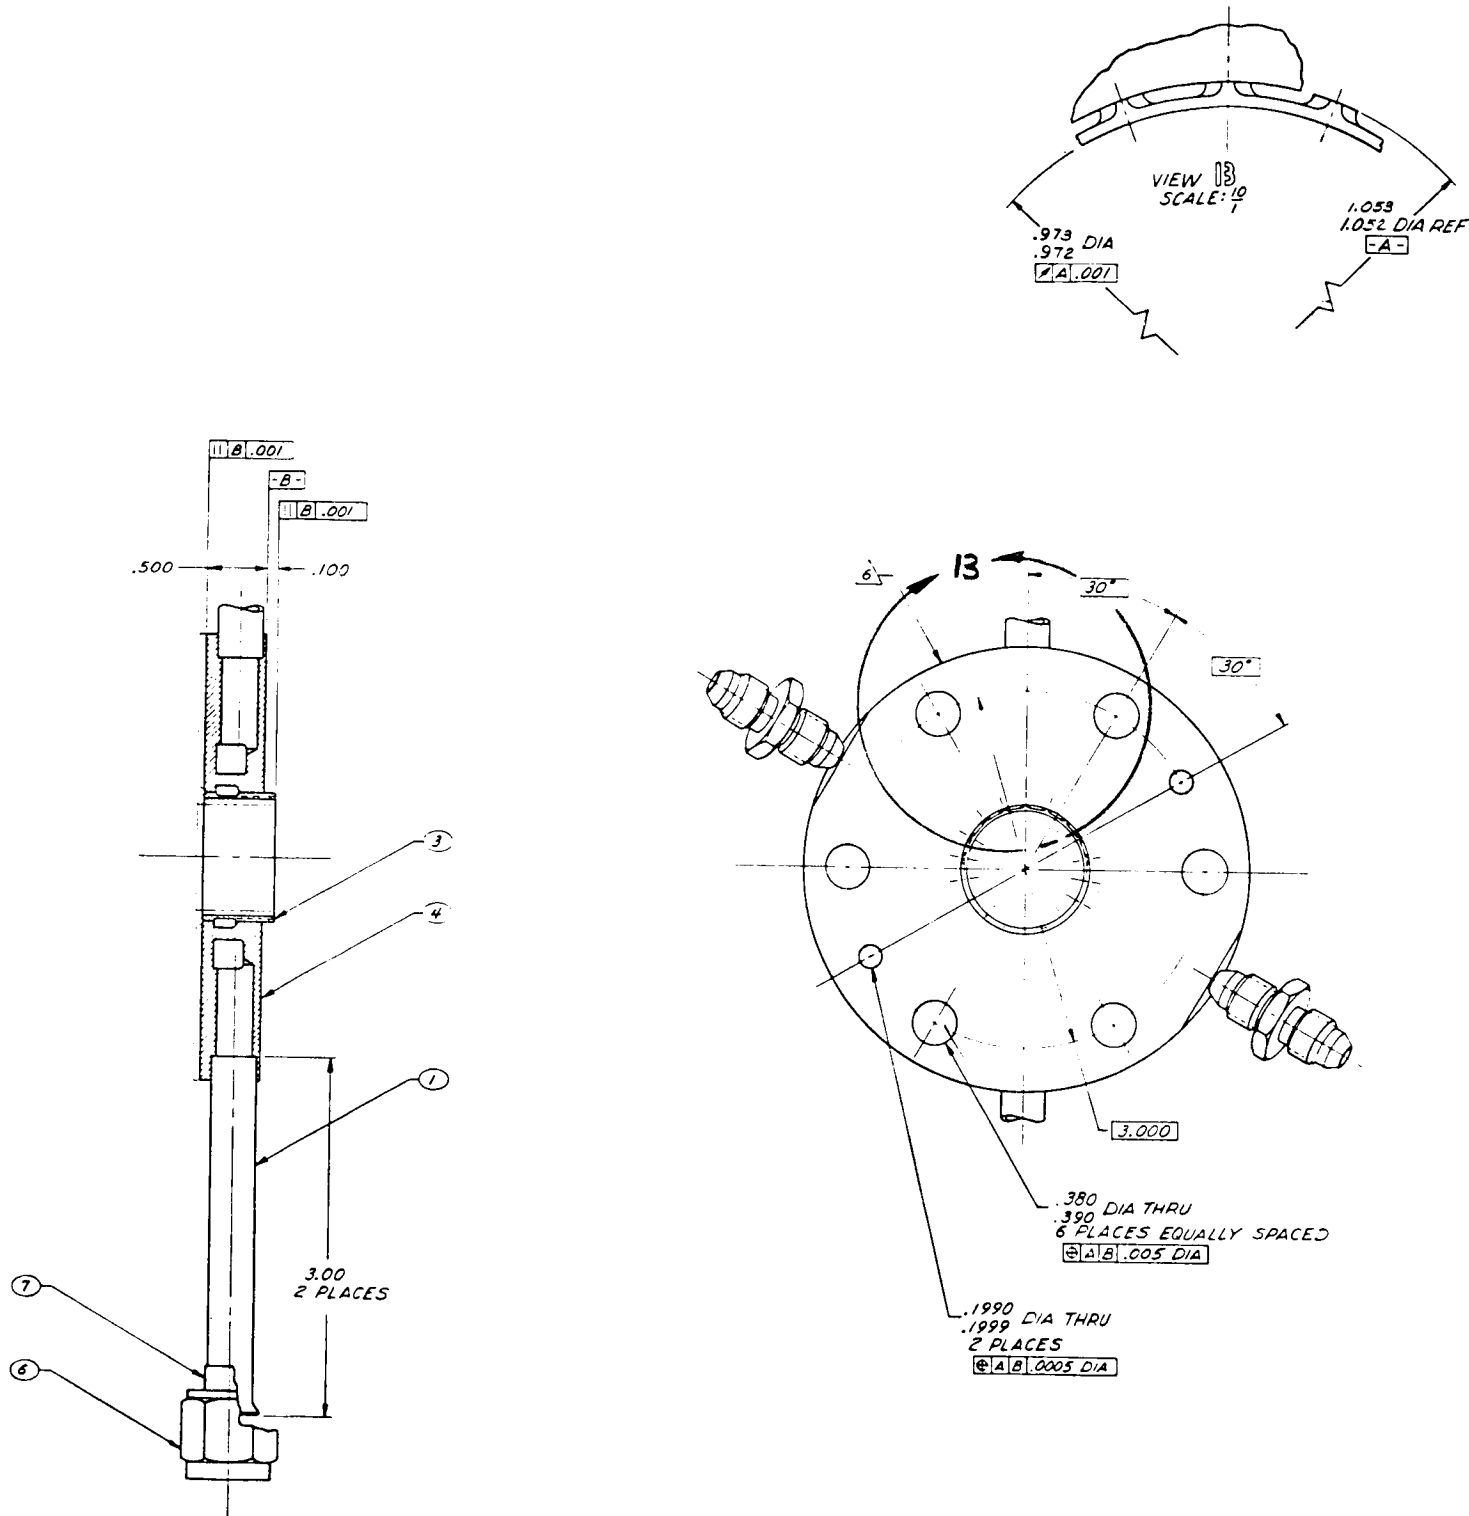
CYLINDRICAL SUPERSONIC FILM COOLANT INJECTOR ASSEMBLY,
